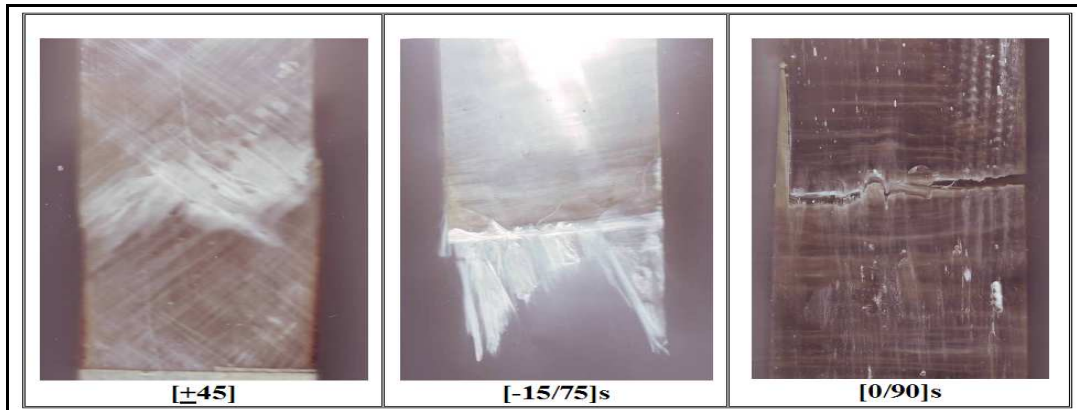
Angle-Ply Laminates Specimens after Tensile Tests
